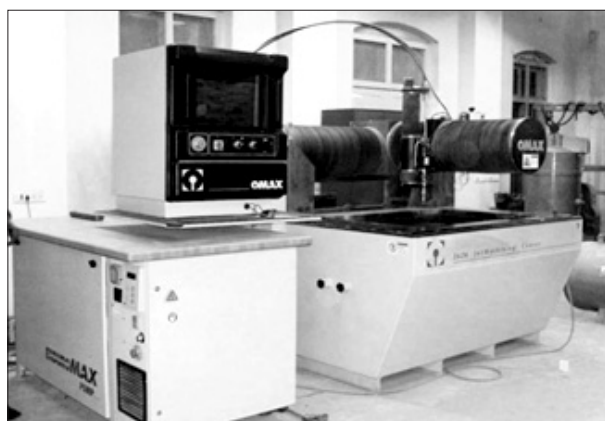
Photograph of AWJ machine used in the project work (Side view).
